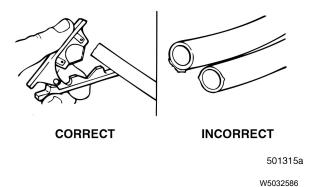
Use a Tubing Cutter for Proper Cut Edges
